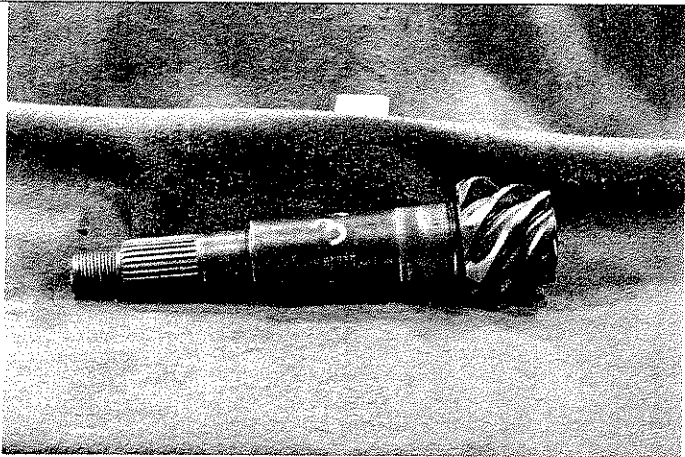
PINION GEAR SET #3-AS RECEIVED
